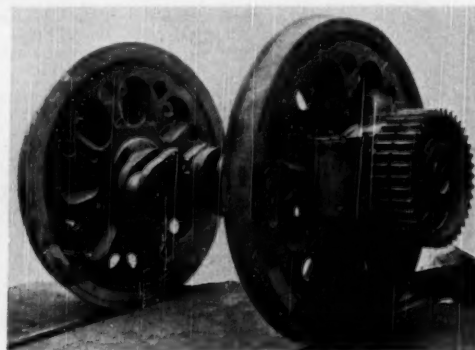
WHEEL AND AXLE ASSEMBLY, LEADER CLASS
